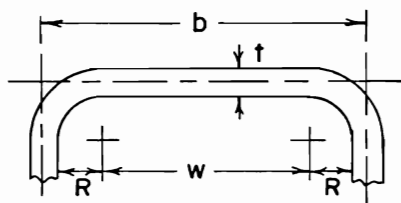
STRUCTURAL ELEMENT SECTIONS - BUS A
